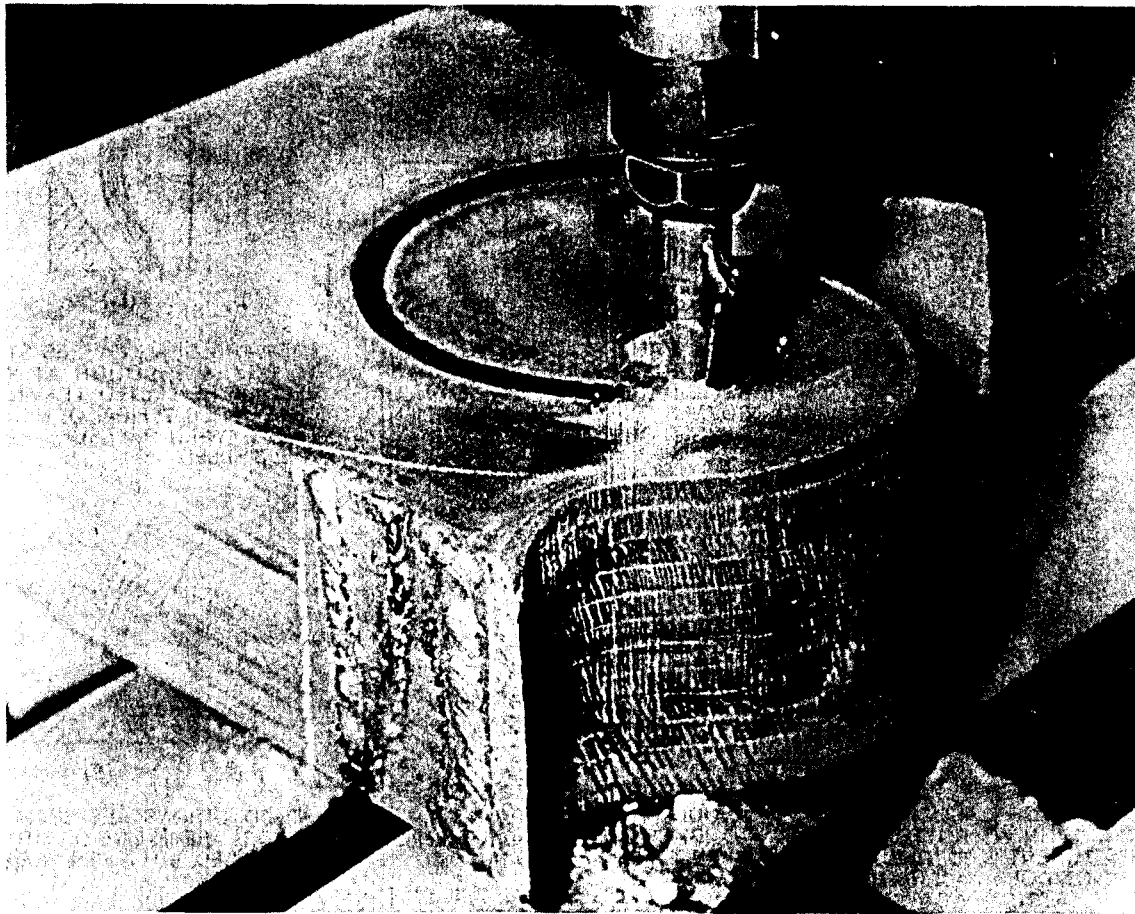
Typical Stack Cutting Operation With the Plates Clamped by Vertical Welds
